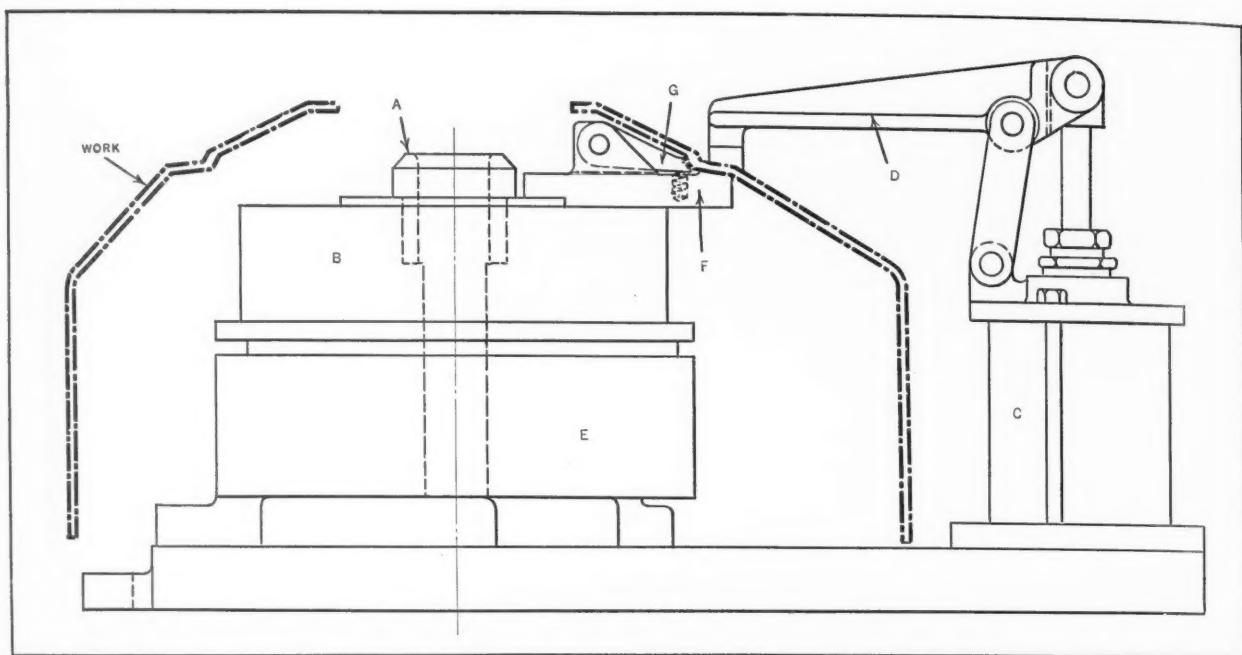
Fixture Used in a Group of Four Beneath a Radial Drilling Machine
